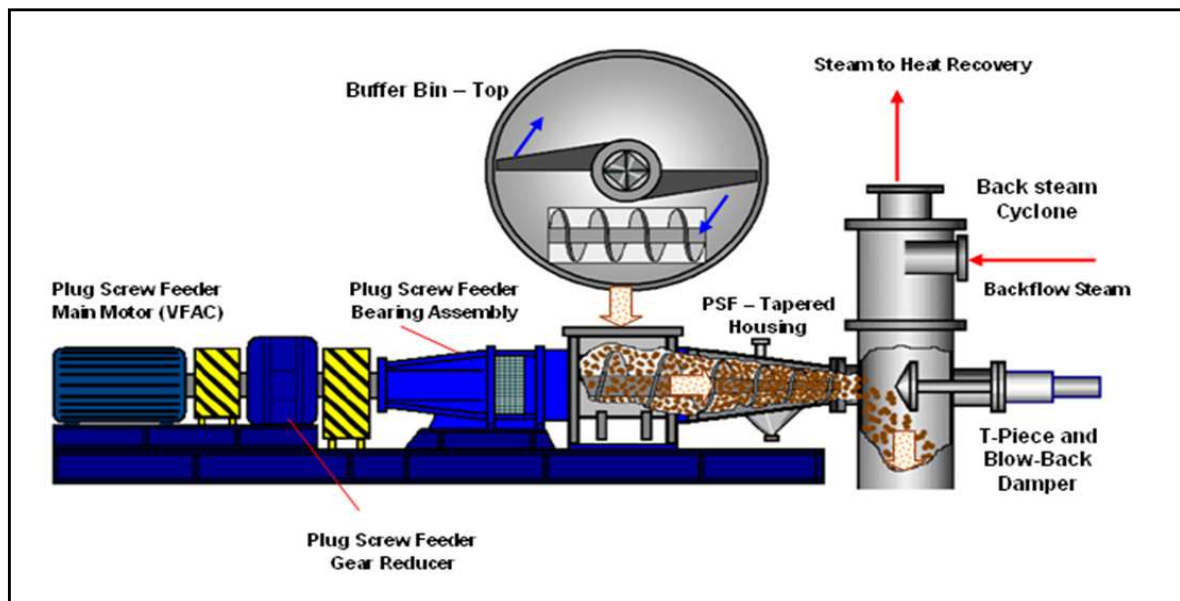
Plug Screw Feeder – General Assembly [ANDRITZ]
